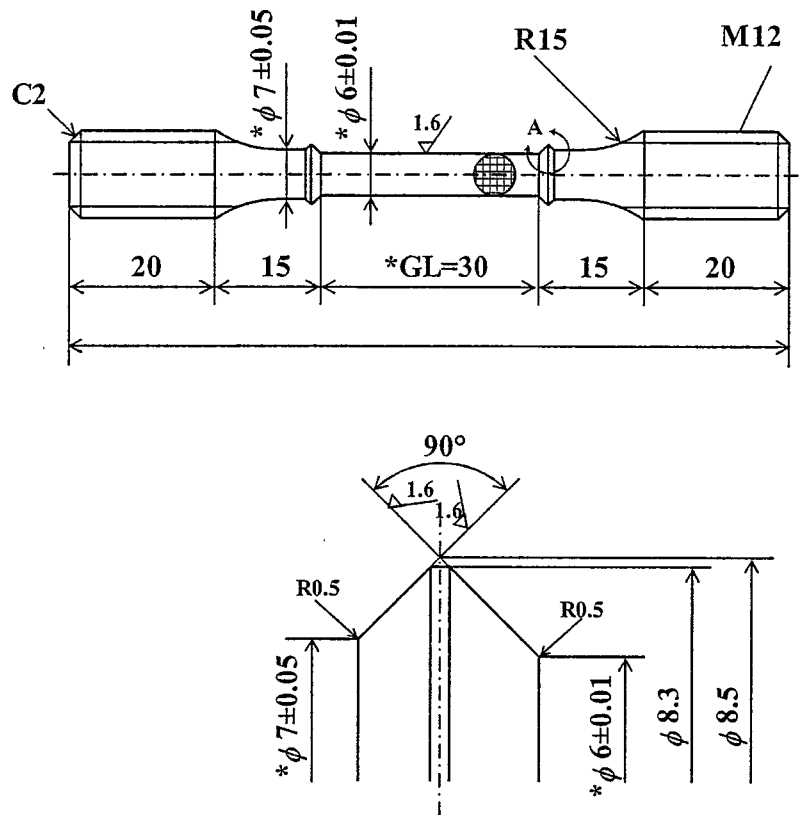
Shape and dimensions of the specimen for tensile test
